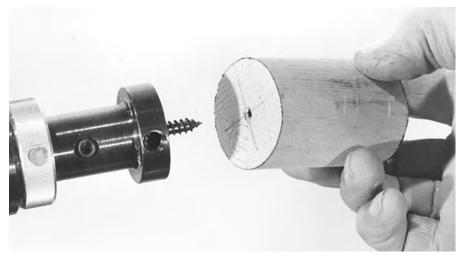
Small workpieces can be turned by mounting them on a screw center. Be sure there are no chips between the workpiece and the screw center's front face.
